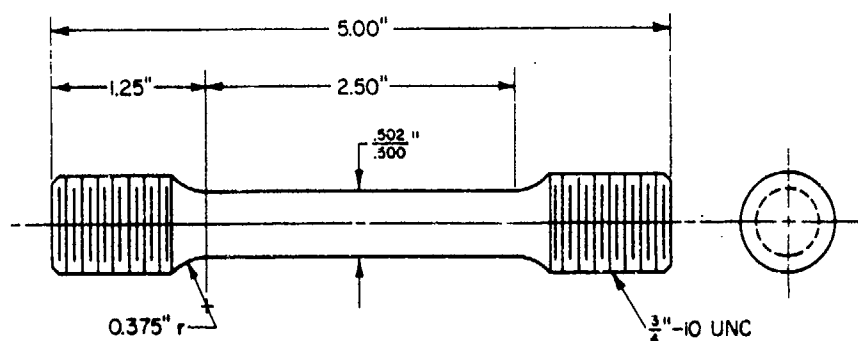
Tensile specimen for 7149-T73 hand forgings.
